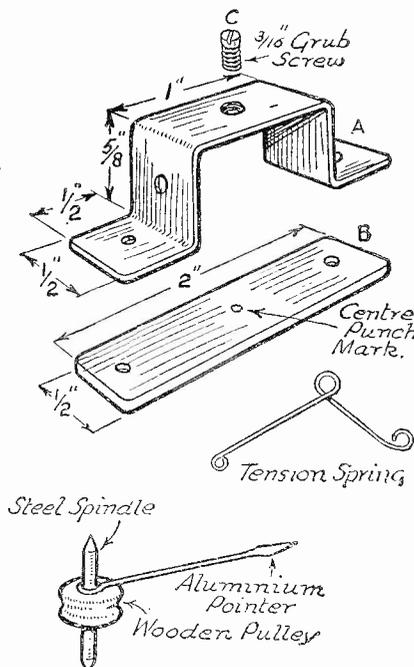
The above sketches give all constructional details for the more important parts of the meter described.
